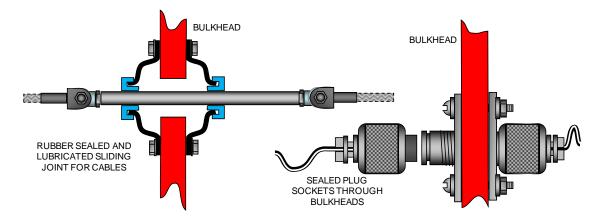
Equipment Sealing through Pressurised Bulkheads
